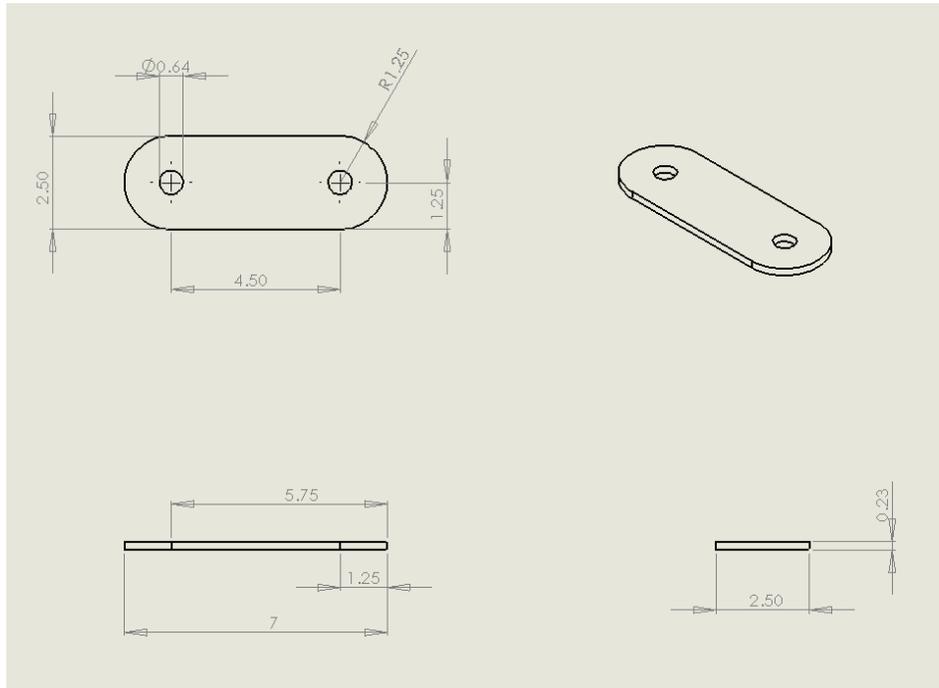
Larger Knee Linkage. This linkage was created from a piece of sheet steel using a band saw, drill press, and power sander. This linkage is placed on the front right side of the knee when viewed head on, as shown in Figure 6.
